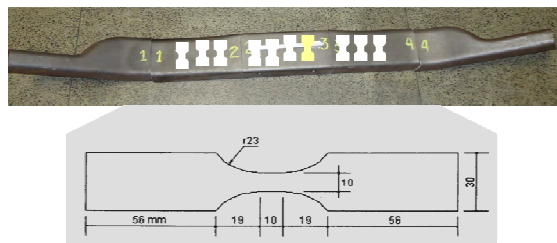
Geometry and dimensions [mm] of the specimens taken from manufactured parts.
